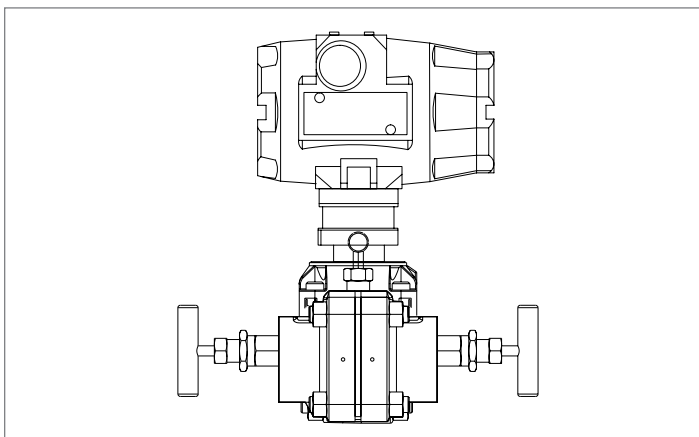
TEK-DP 1610D with 3-Valve Manifold Front View
